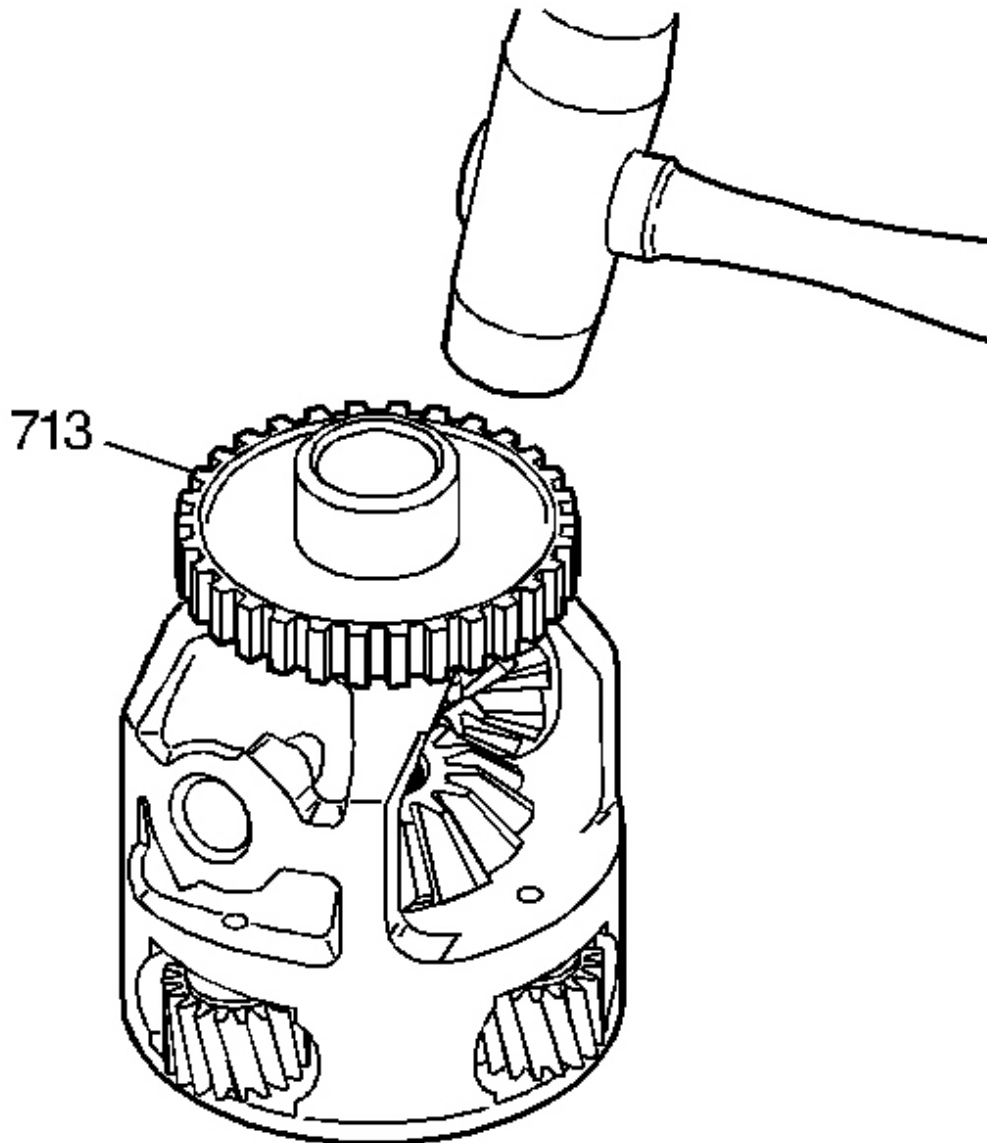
Installing Vehicle Speed Sensor Reluctor Wheel
